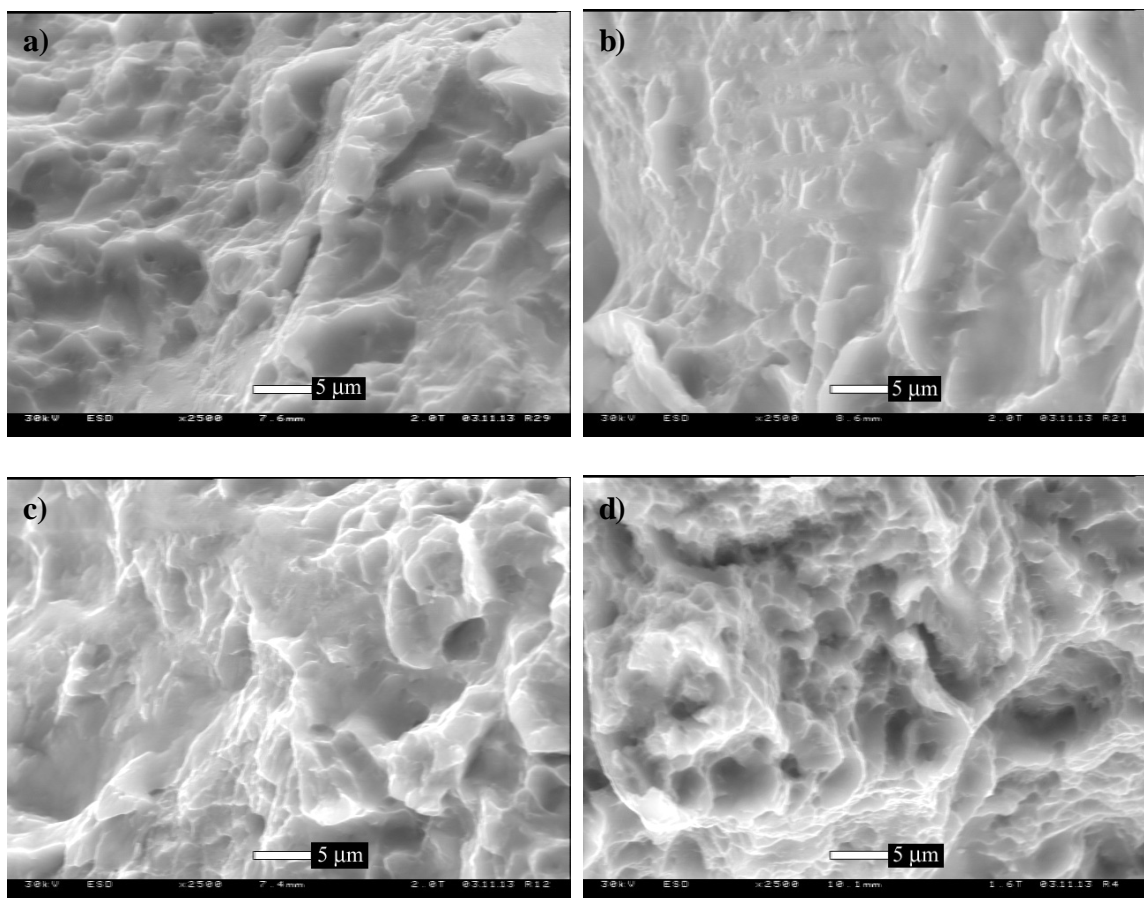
Fracture surfaces of tensile specimens, 2500x. (a) Base metal, (b) matching filler metal weld, (c) modified 50 ppm Y filler metal weld, and (d) modified 200 ppm Y metal.
